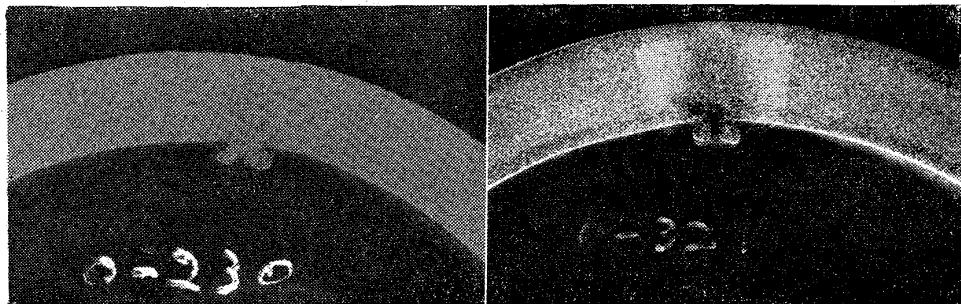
Macroscopic structure of the weld. Double inside bead and molten down of the inside are shown. Both troubles are due to miss setting of the butting edges of the skelp.
